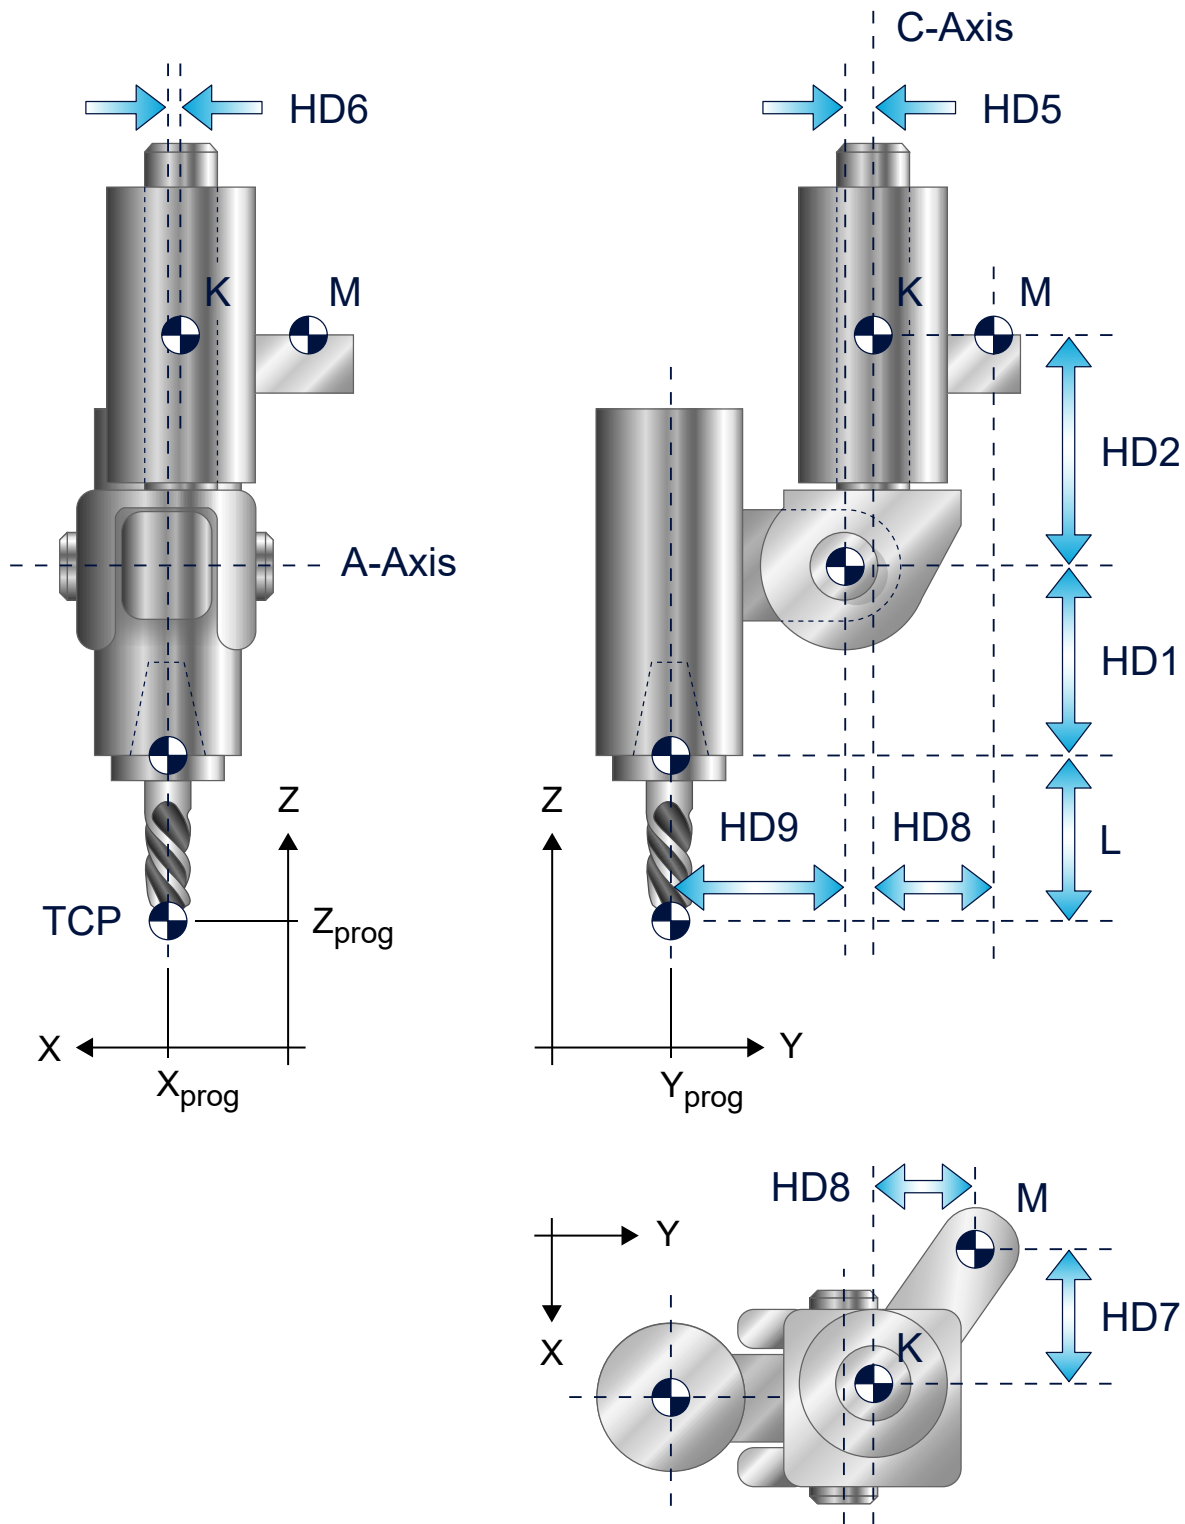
5-axis boring and milling tool (zero position where HD3 = 0, AM=0, HD4=0, CM=0)
